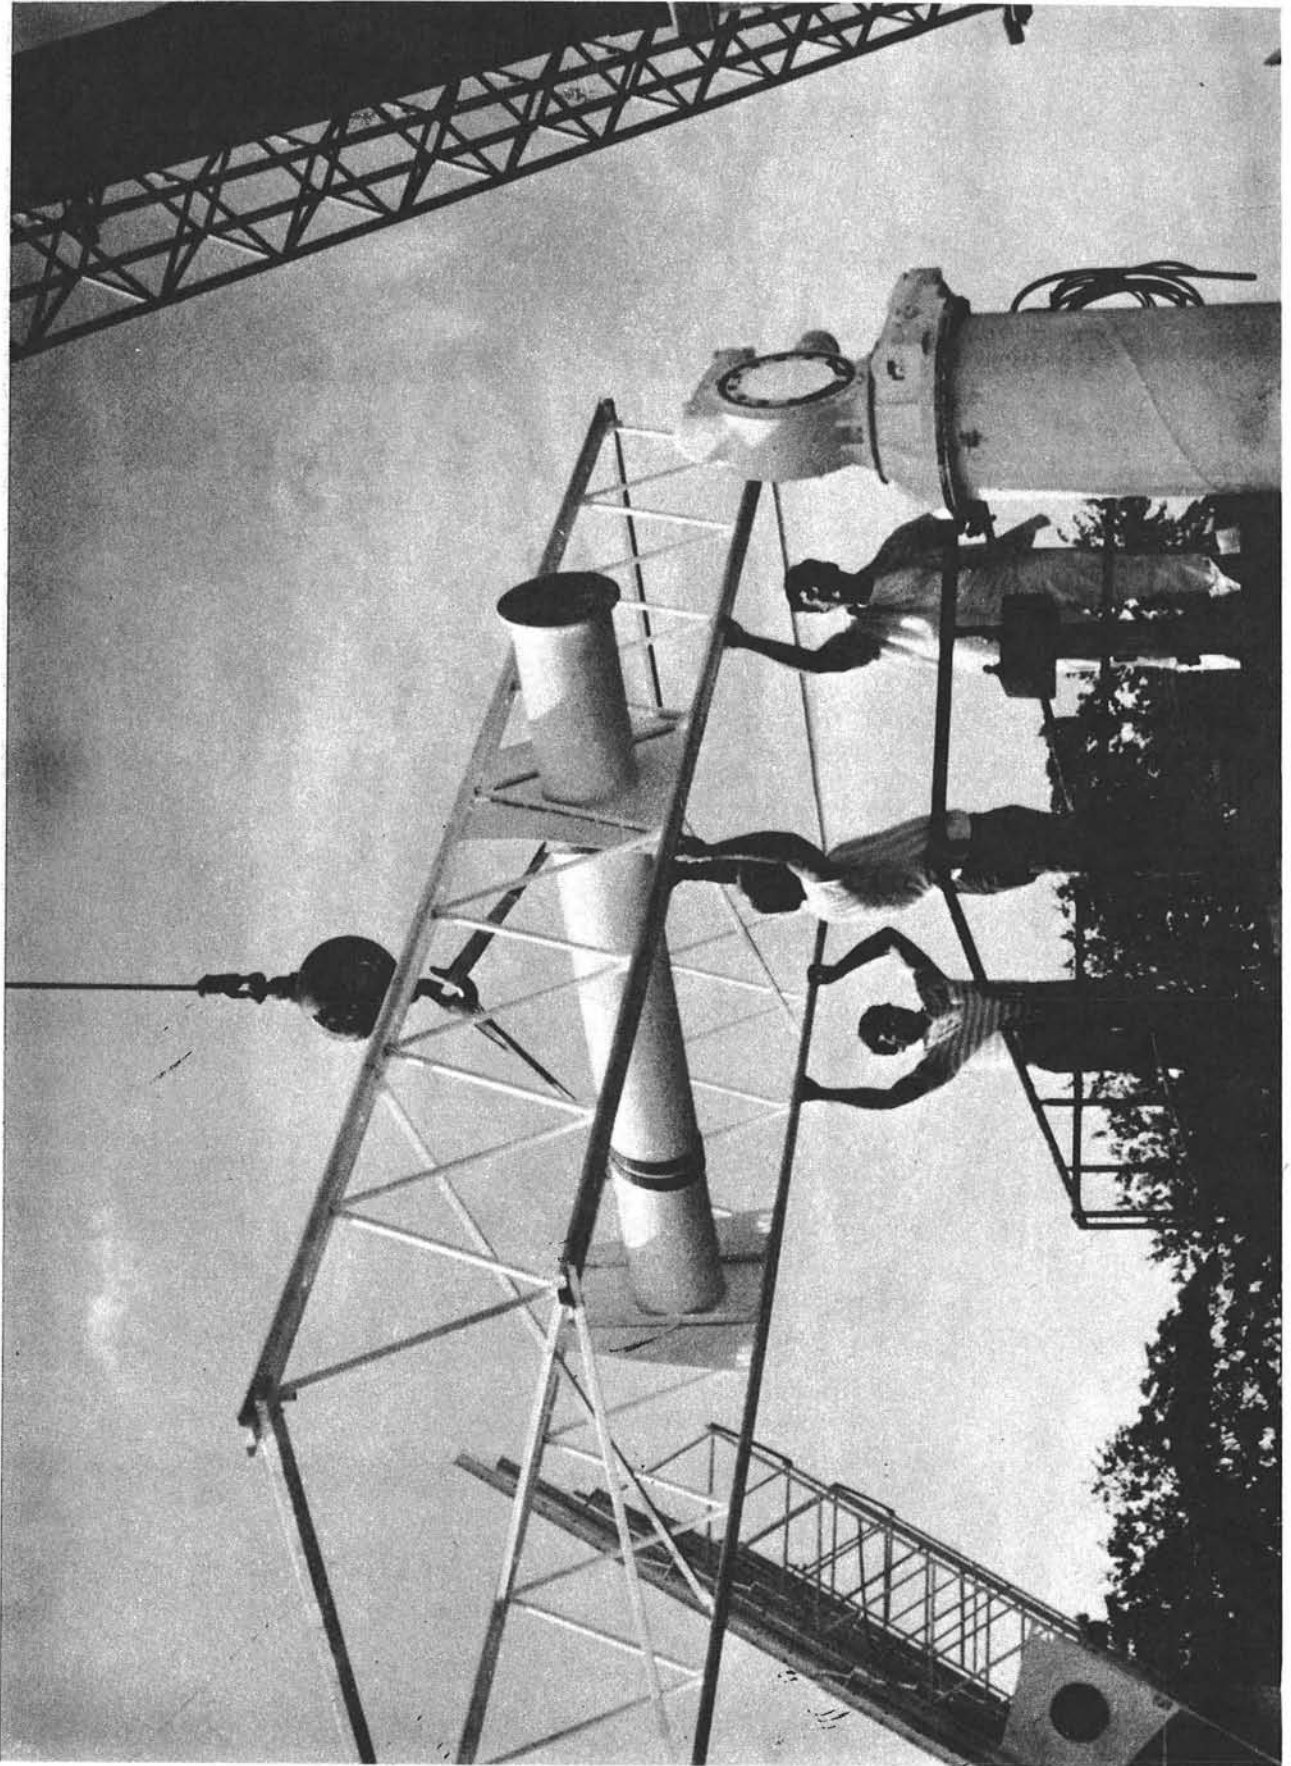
Torque Tube and Truss Assembly Being Mounted to Drive Unit
